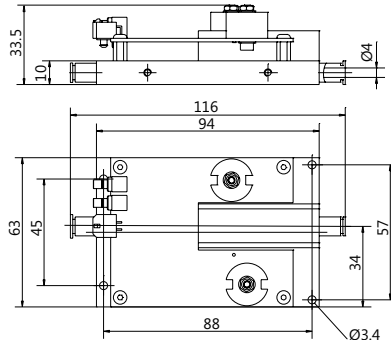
Outline drawing of DPS/DPD series driver with general purpose pad
